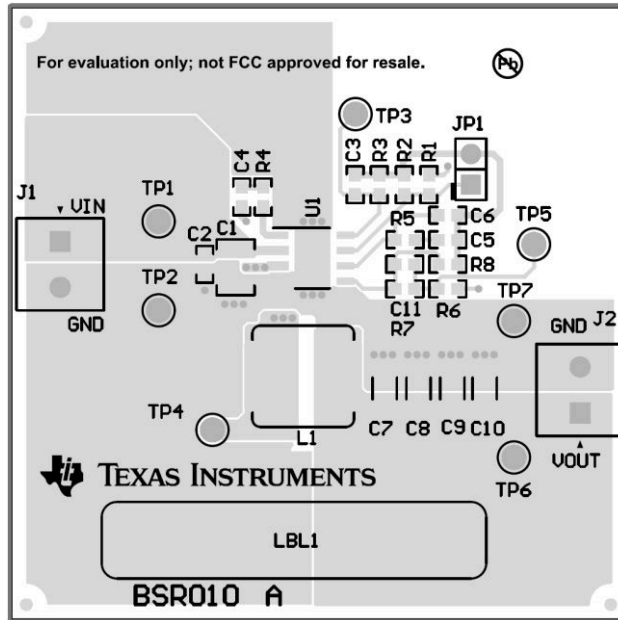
TPS54336AEVM-010 Top-Side Layout
